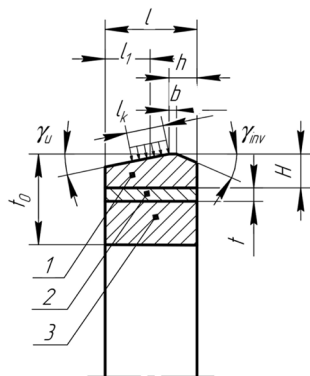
The structure of a prefabricated deforming element: 1 – solid-alloy ring; 2 – ring made from lightweight material; 3 – steel ring
